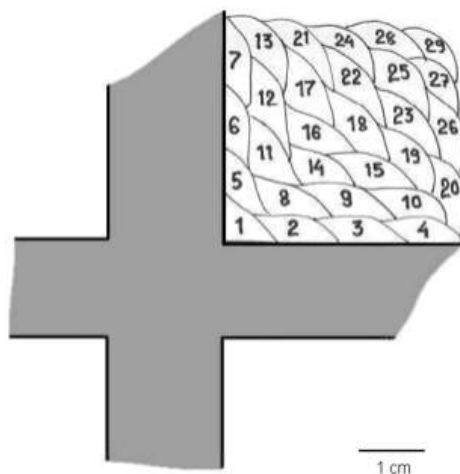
Welding sequence of the pure weld metal test block of Alloy 182. [12]
